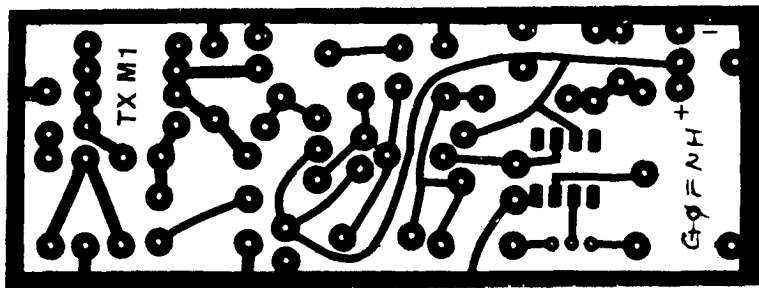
Transmitter Modulator and Gunn Diode supply PCB layout.
